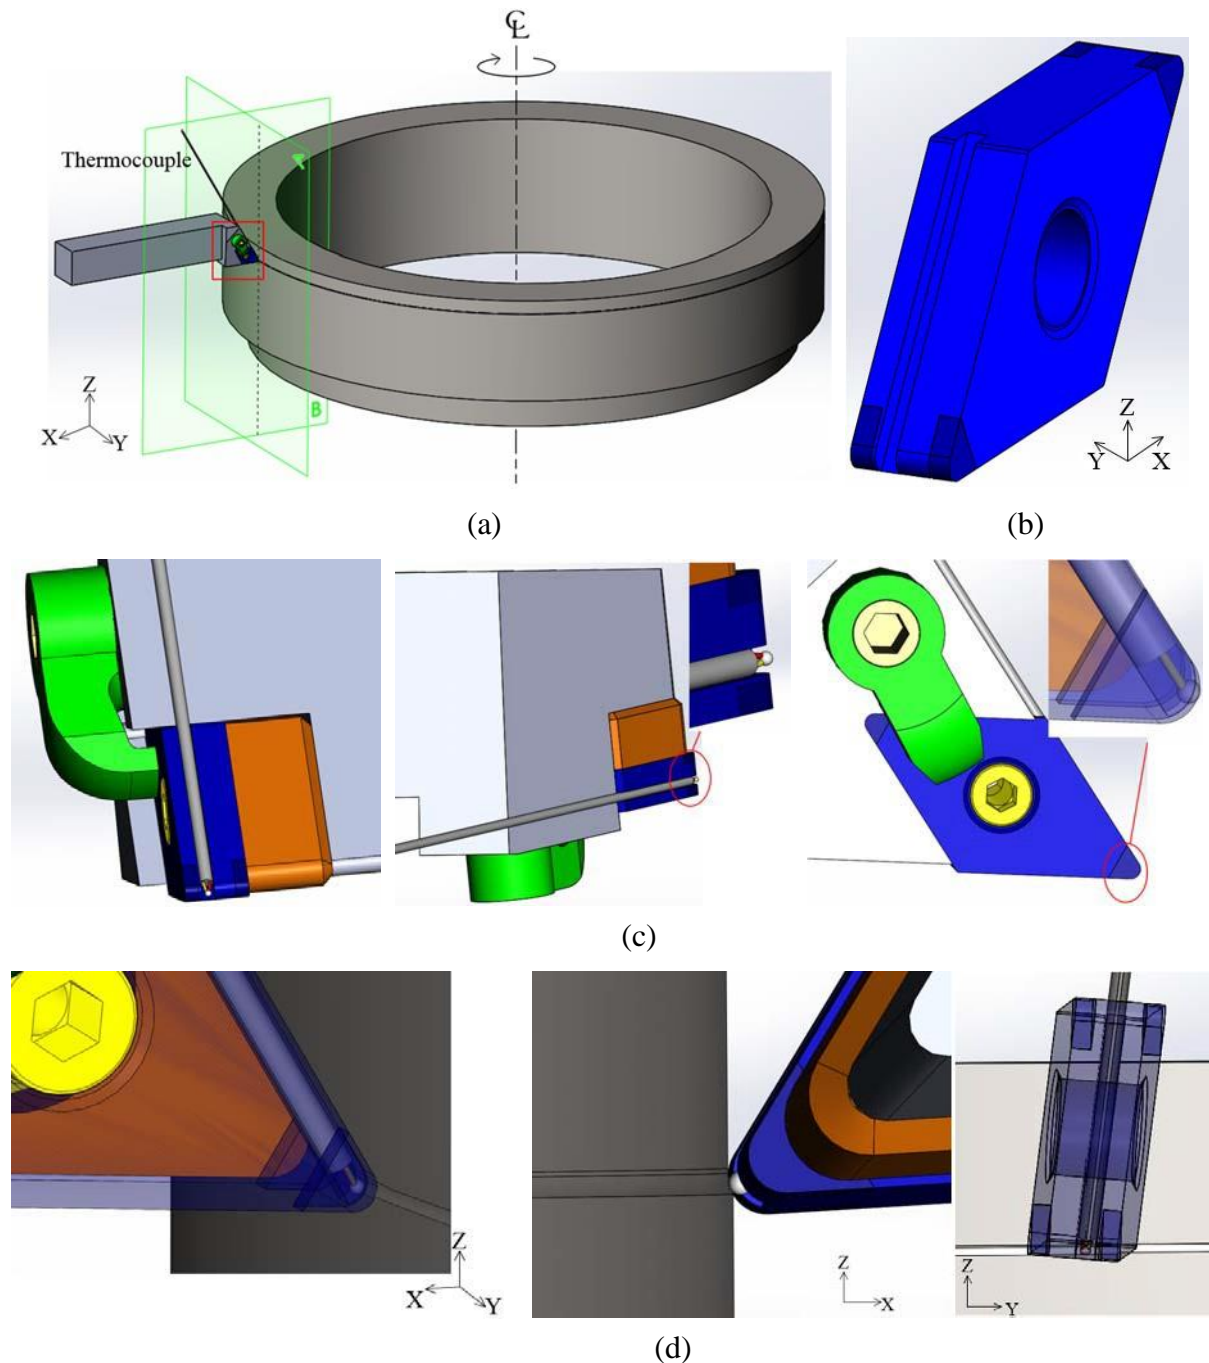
Embedded thermocouple method: (a) overall setup, (b) cutting tool with a slot grinded for thermocouple to reach the machined surface, (c) the micro-thermocouple tip in the cutting tool, and (d) the contact between the micro-thermocouple tip and grooved machined surface.
